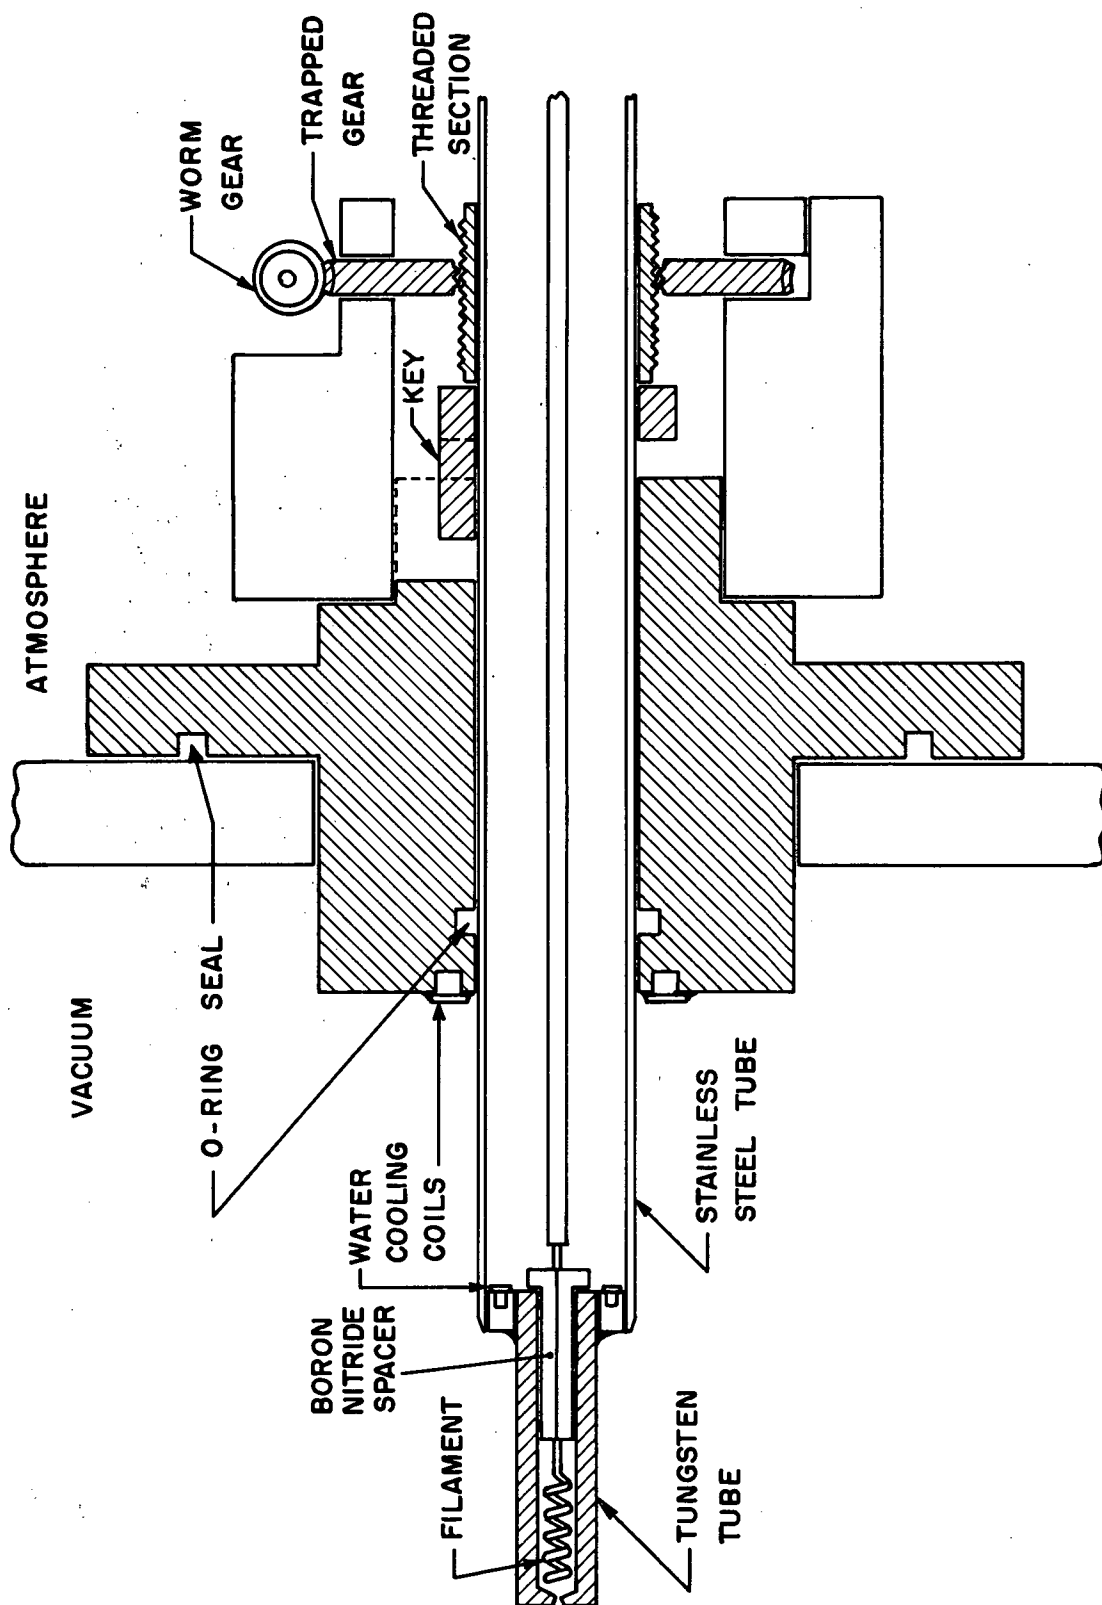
CROSS SECTION OF SOURCE TUBE, HOLDER & MOTION DEVICE
